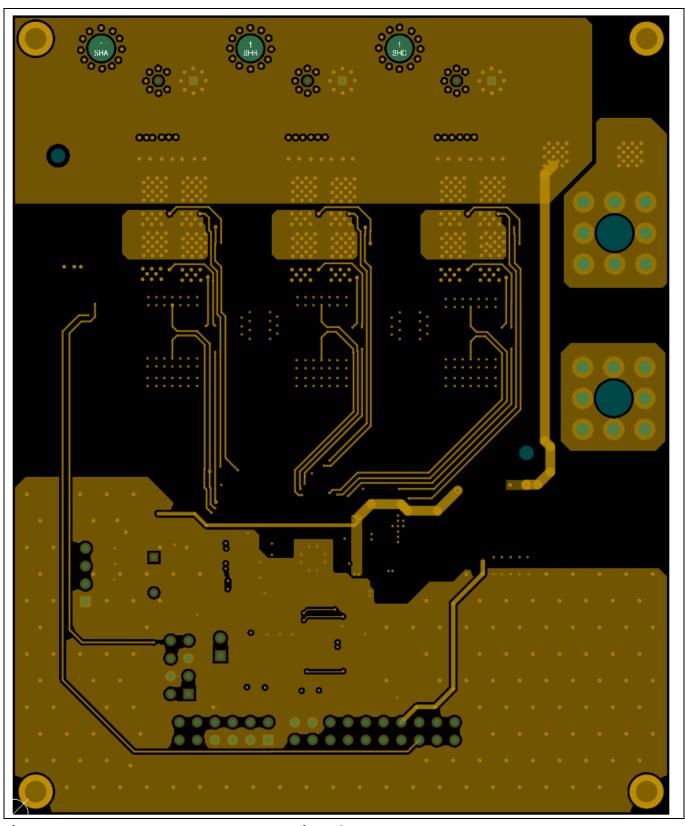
EVAL_6EDL7141_1KW_36V PCB inner layer 2
